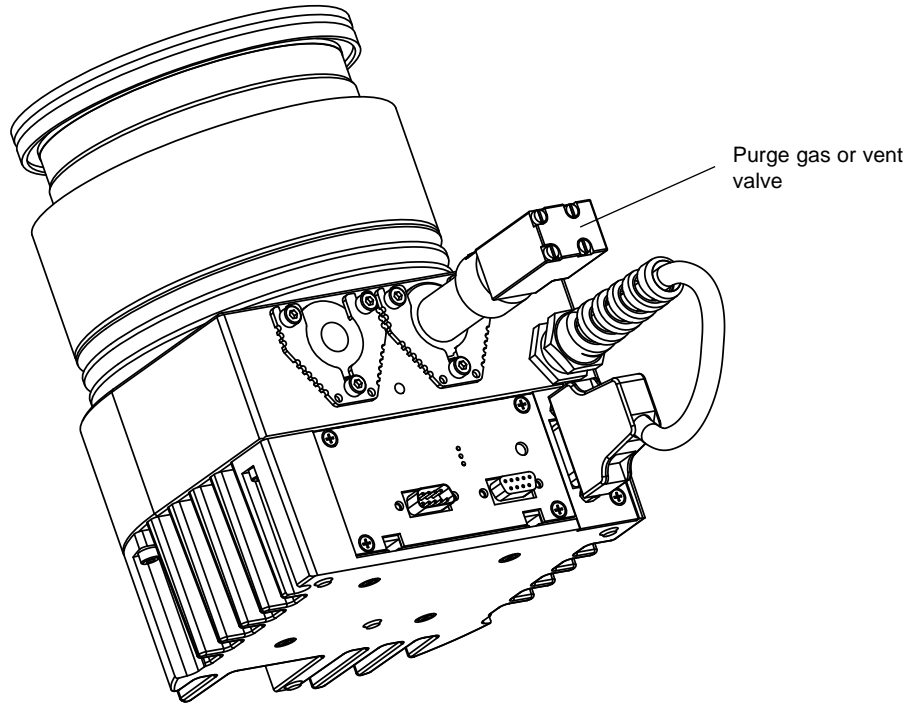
Purge gas or vent valve flanged to a TURBOVAC TW 300
